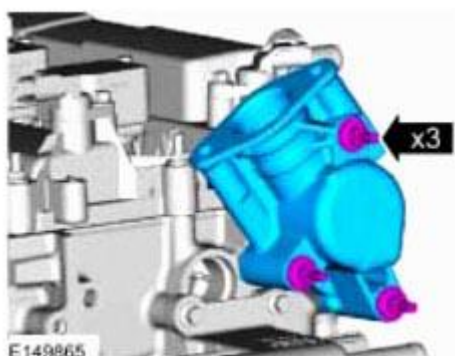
Locating Fuel Injection Pump Cover Stud Bolts
